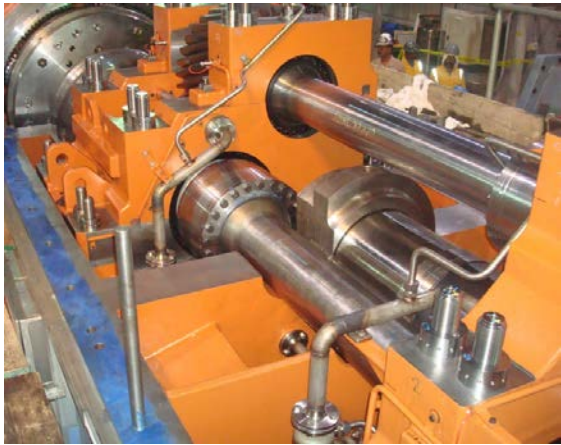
Extruder Gearbox Torsion Distribution and Output Shaft Section
